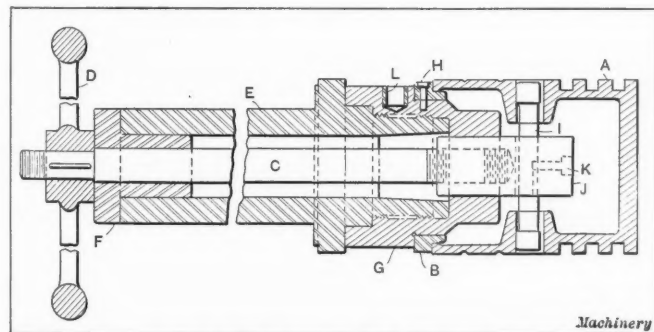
Device used for Holding Pistons in Potter & Johnston Automatic Turret Machines while Grooving, Facing and Turning
